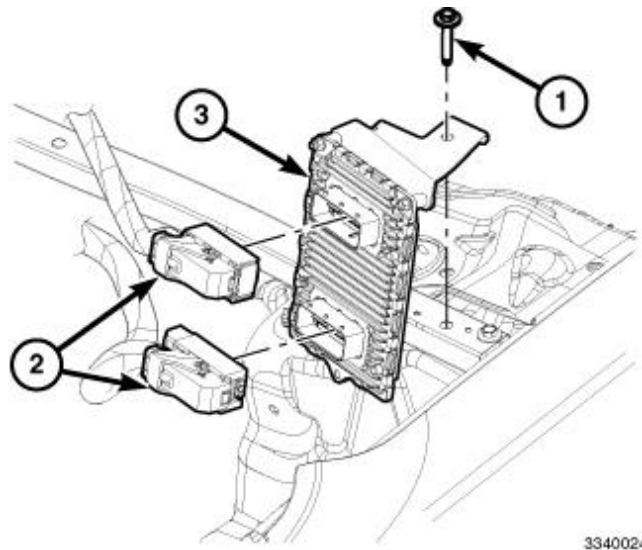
Retaining Bolt, PCM Electrical Connectors & PCM
